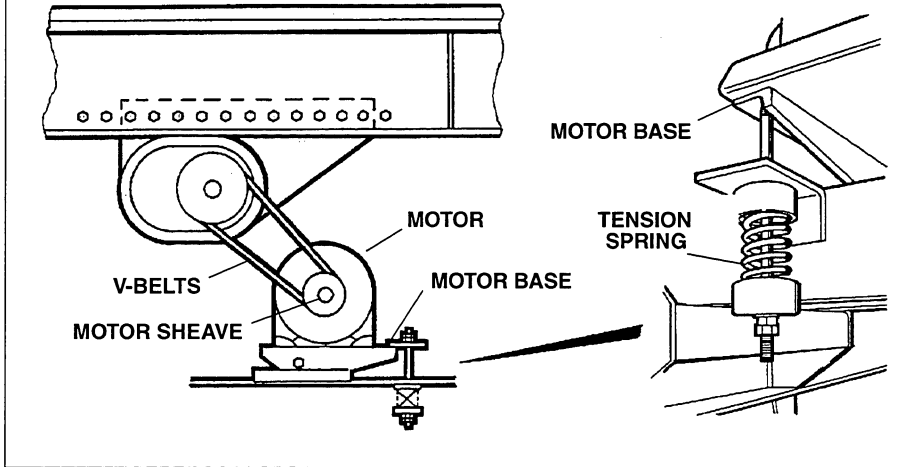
Adjusting Belt Tension (Electric Motor Drive)
